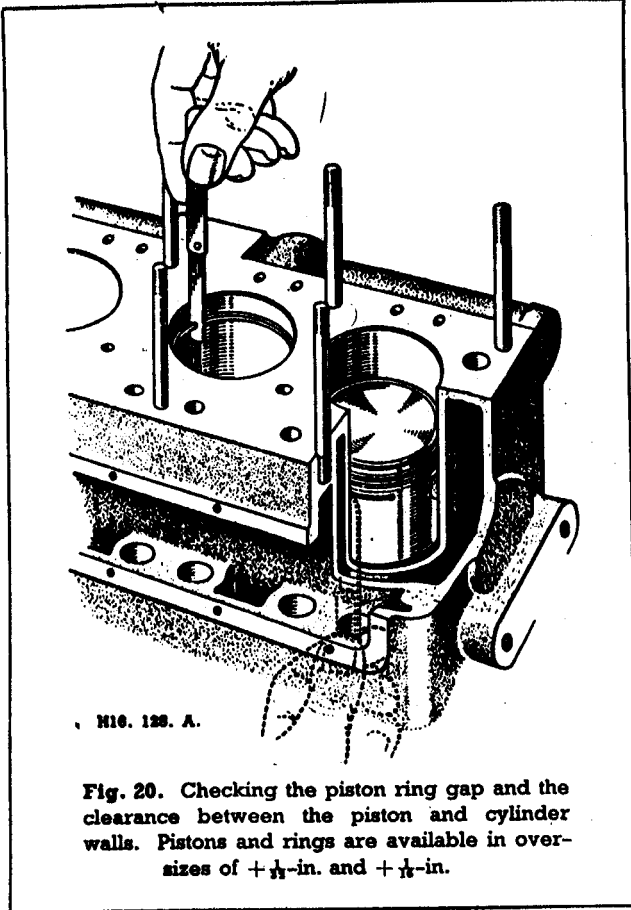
Checking the piston ring gap and the clearance between the piston and cylinder walls. Pistons and rings are available in over-sizes of $+\frac{1}{16}$ -in. and $+\frac{1}{8}$ -in.
